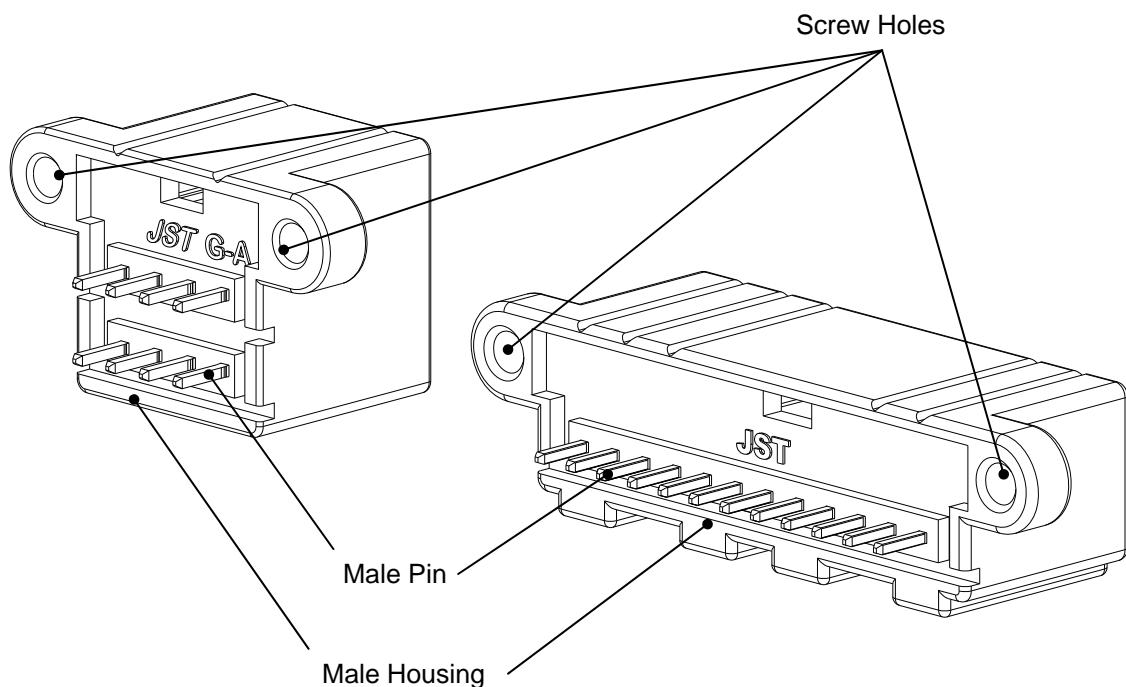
Male Housing Assembly with Screw holes (e.g. 8 & 12 position)
